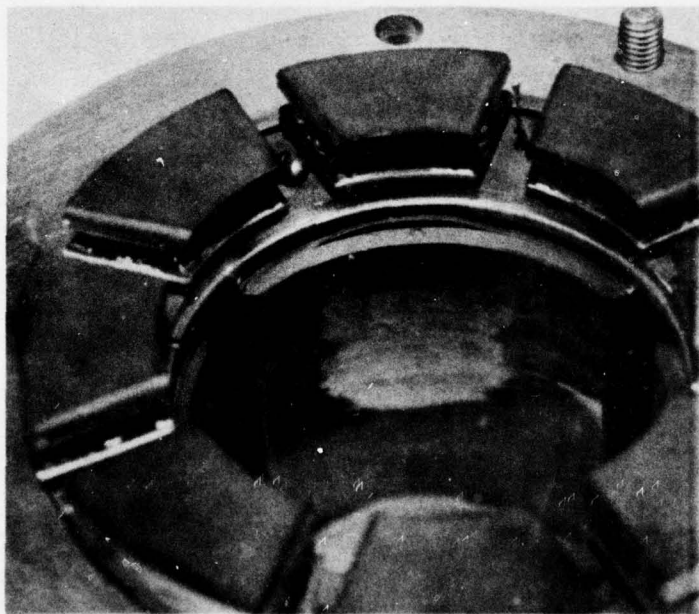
Photograph of Damaged Aft Journal Bearing
